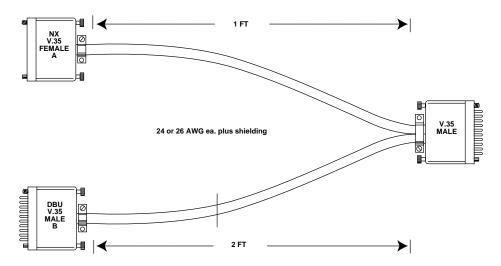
Nx/DBU Plug-On Board Cable Assembly
